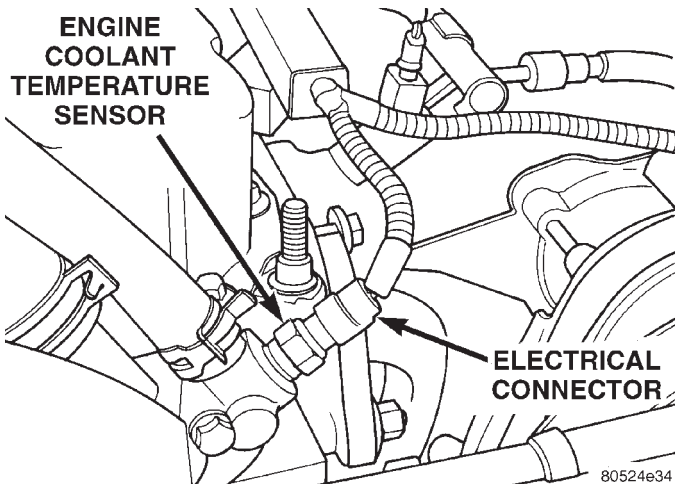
Engine Coolant Temp. Sensor—4.0L Shown
